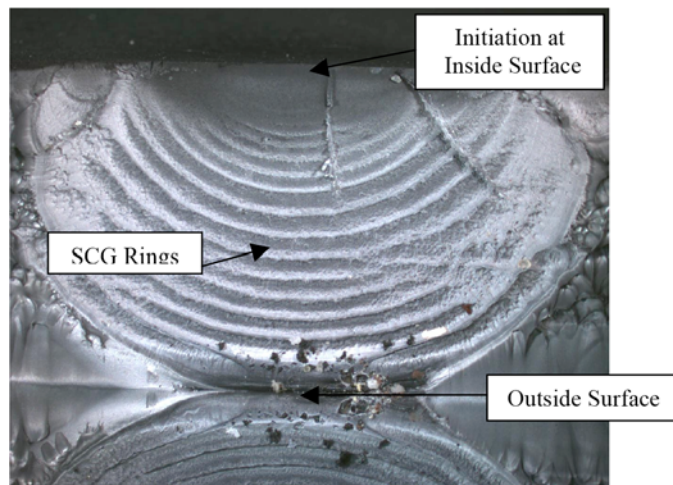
Optical image showing fracture face (oxidatively induced Stage II)
